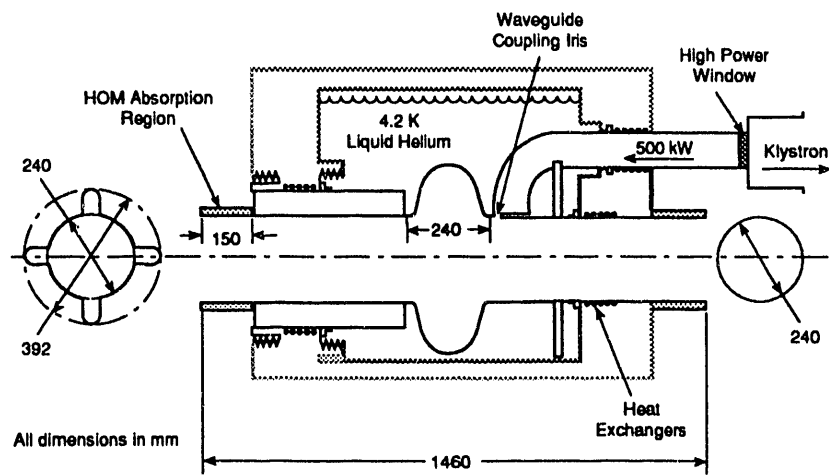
SCRF cavity design from Ref. [4]. Coaxial HOM damping loads are located on the beam pipe inner surfaces.
